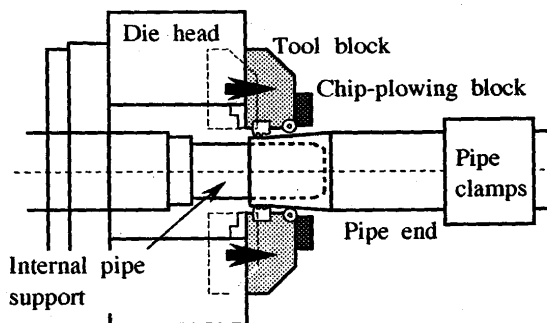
Cross sectional view of threading part with pipe-rotating type threading machine.
